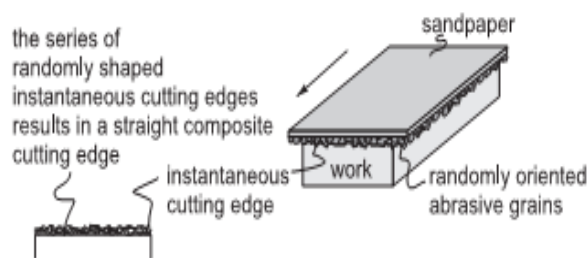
The concept of undefined cutting edge in abrasive machining. (Source: Valery Marinov, Manufacturing Technology)
